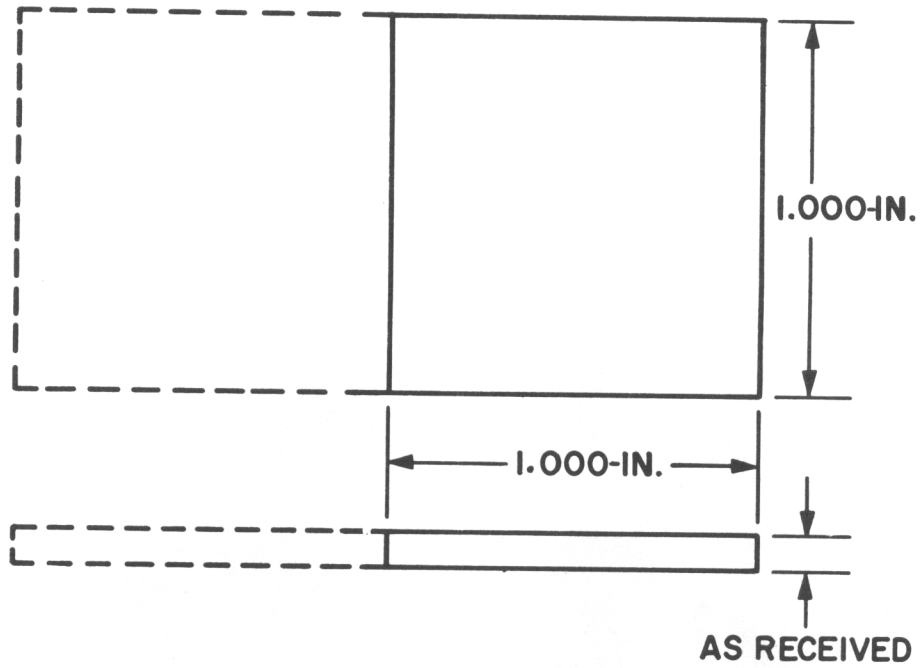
Trial Butt-weld Specimen Drawing
